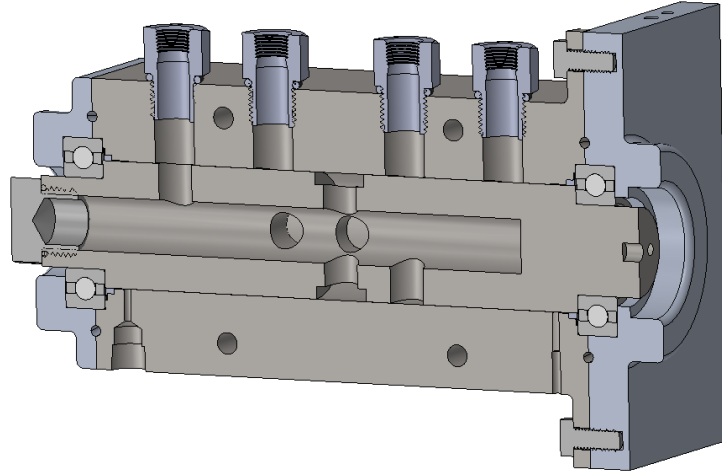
Section view of Chermesnok’s rotary spool valve design showing alignment of one output port [12]
